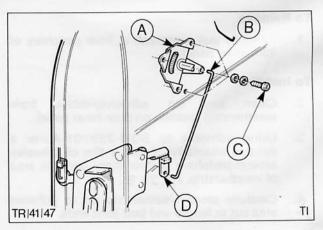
Remote control assembly side door C - Screw A - Remote control B - Connecting rod D - Lock lever
